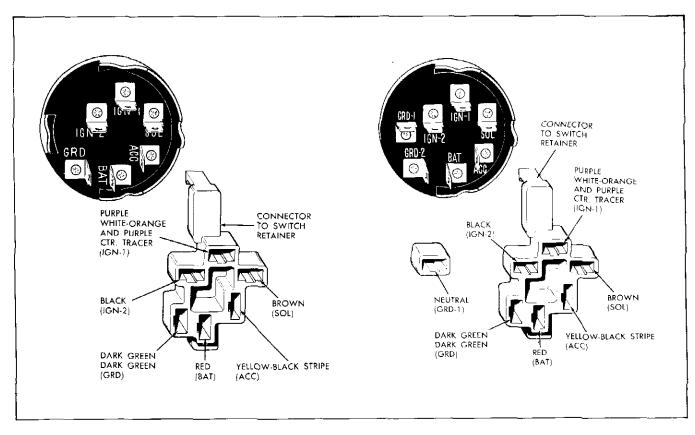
Comparison of Back Side of Ignition and Starter Switch Assemblies
